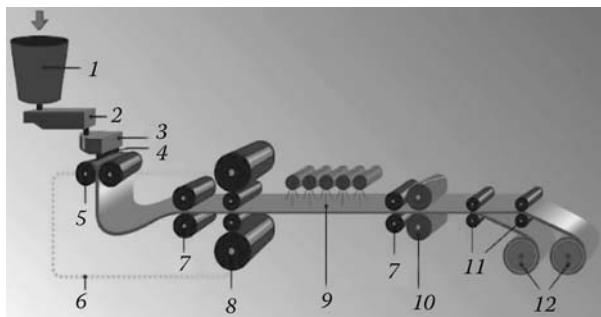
Schematic of Crawfordsville CASTRIP® casting machine: 1) ladle; 2) tundish; 3) transition piece; 4) core nozzle; 5) casting rolls; 6) hot box; 7) pinch rolls; 8) hot rolling stand; 9) water cooling; 10) shear; 11) deflector rolls; 12) coilers.
